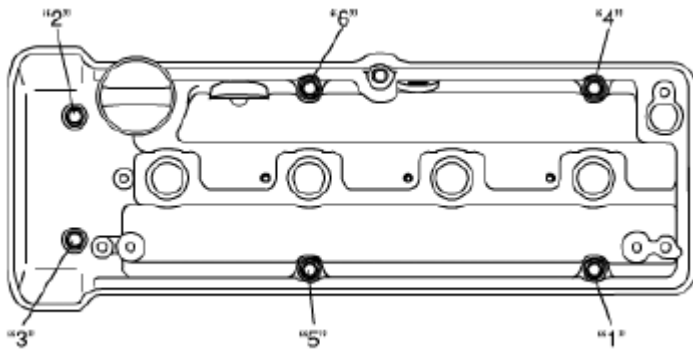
Identifying Sequence Of Cylinder Head Cover Nuts
